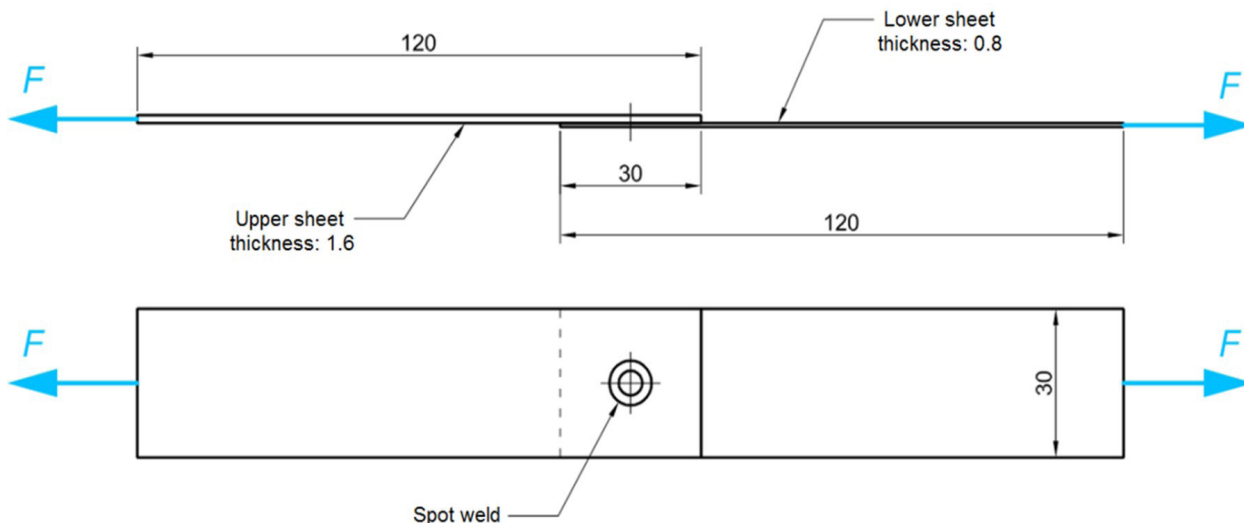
Shape and dimensions (in mm) of the welding specimens
